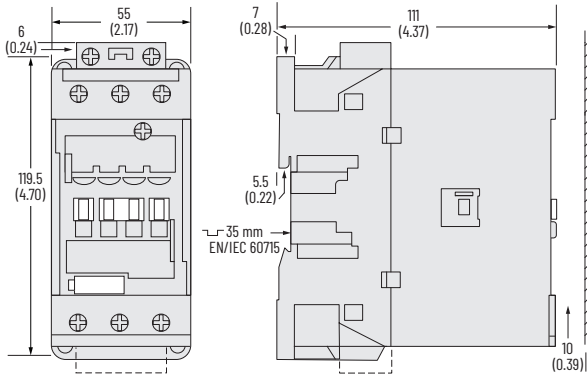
100-E40...100-E65 3-Pole Contactors with Front-mounted Auxiliary Contact
